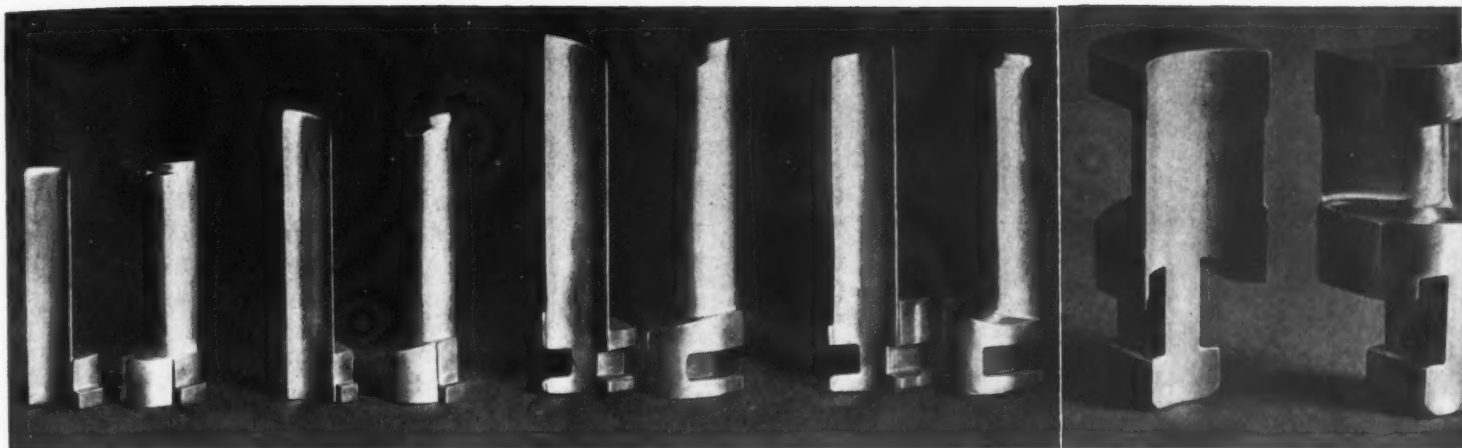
(Left) Some Types of Blades are Built up from a Piece of Non-corrosive Steel, Rolled to the Required Shape, and a Shank, the Two Pieces being Brazed Together. Fig. 5. (Right) Impulse Blades Machined from Rectangular Blocks of Non-corrosive Steel
